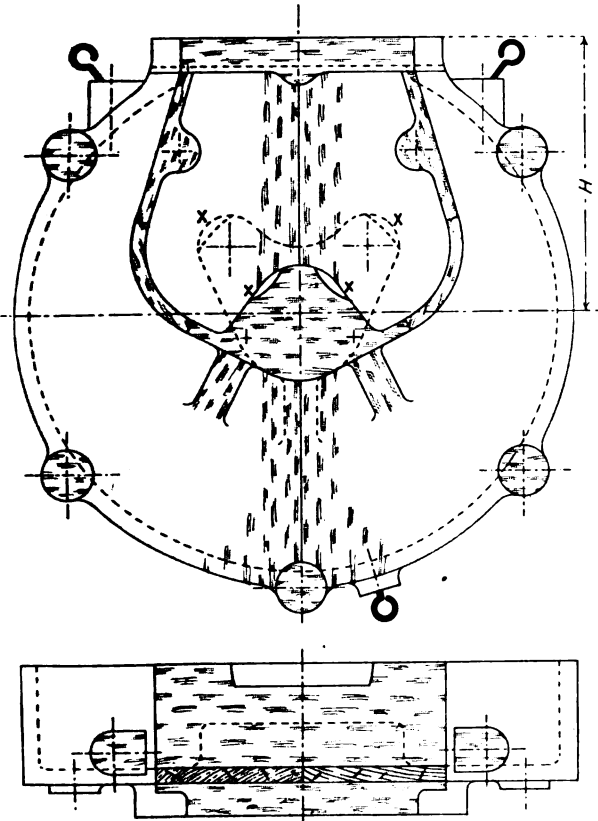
FINISHED PATTERN OF GEAR BOX HALF.
